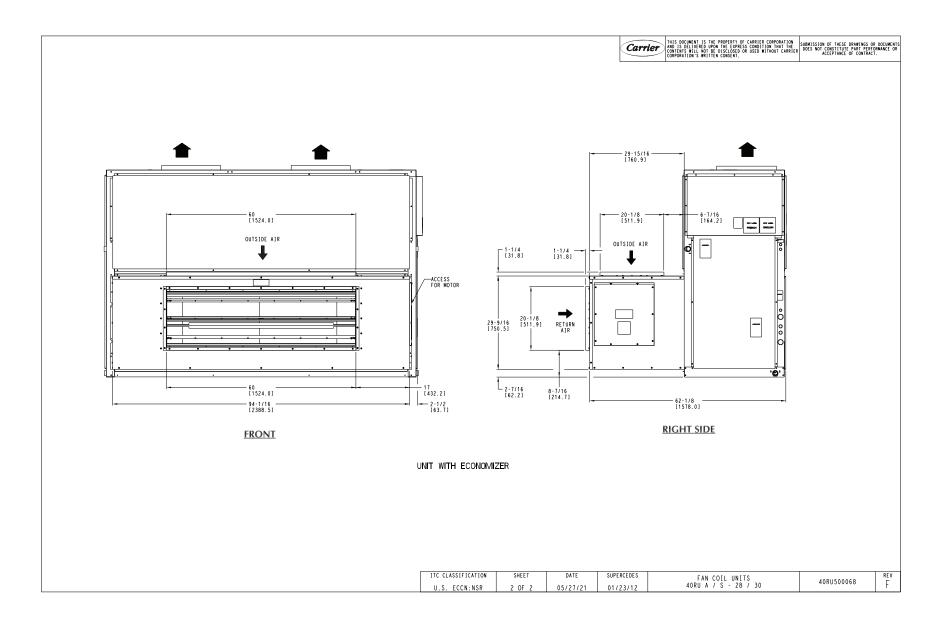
Dimensions — Sizes 28 and 30 (cont)
